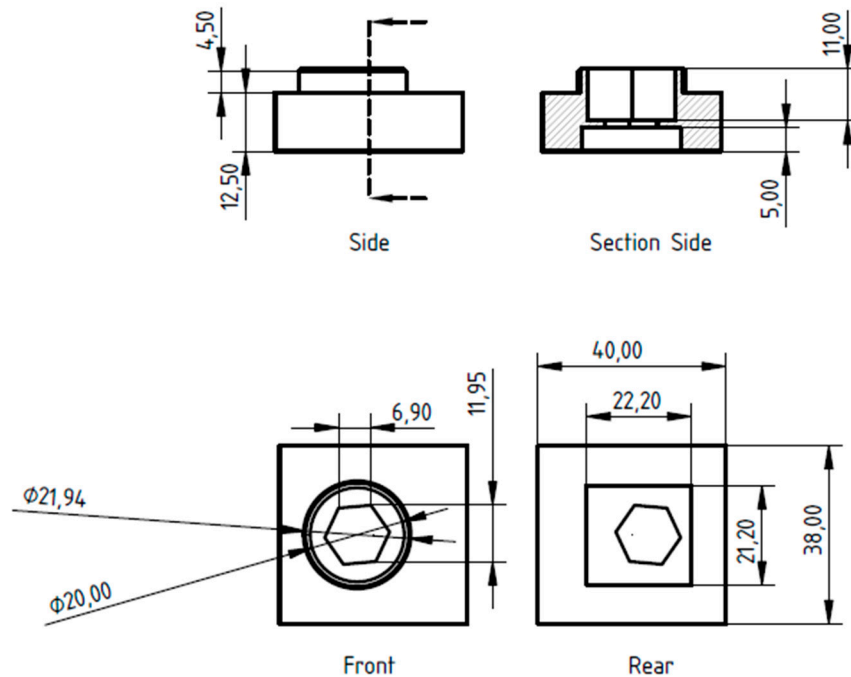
Technical drawing of the spectrometer sensor mount for measuring incident photon flux density. Dimensions in mm. A comma is used as decimal separator in this figure.
